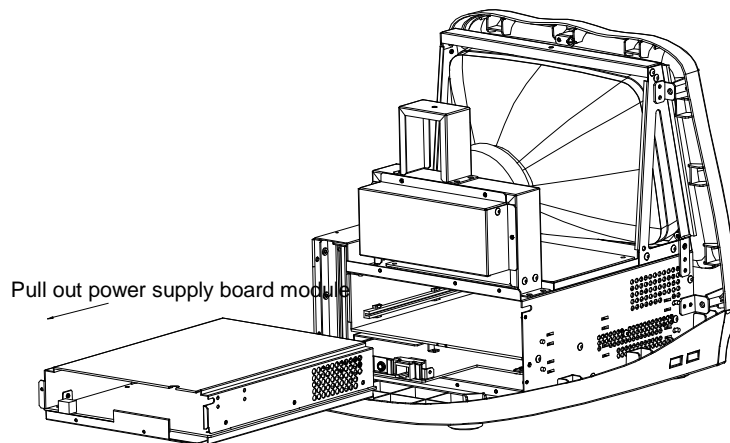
Sketch Map of Power supply board Module Disassembly
